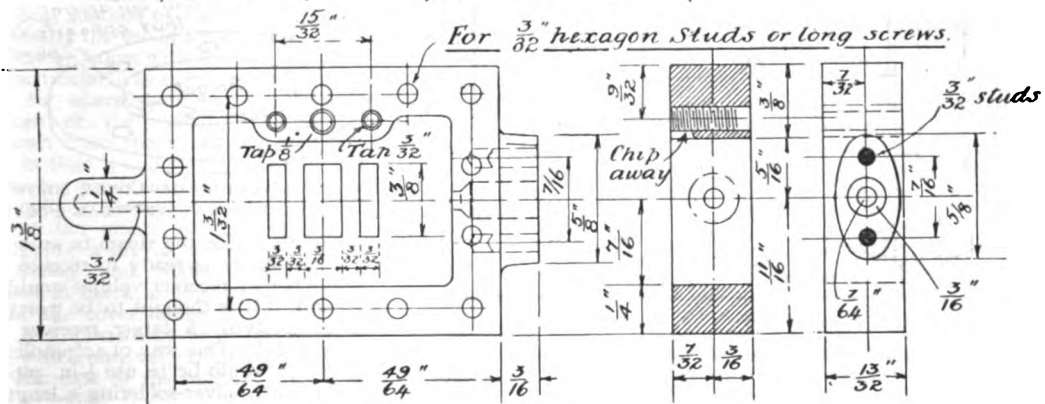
HIGH-PRESSURE STEAM CHEST AND PORTS.
